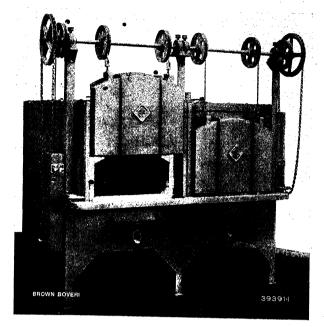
Electric-resistance furnace with 2 chambers for melting down old bearing linings and for preheating bearing brasses, dimensions of each heating chamber $100 \times 600 \times 300$ mm. Input per chamber 10 kW.
